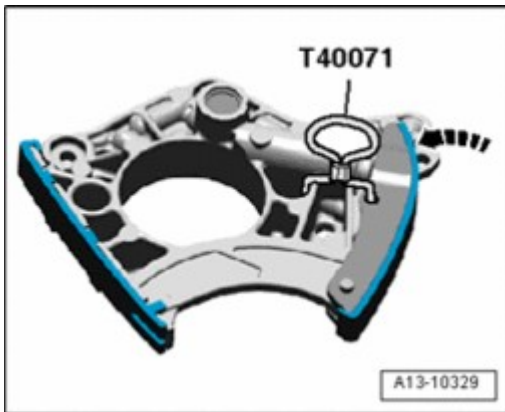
Pressing Left/Right Camshaft Timing Chain Guide Rail Inward And Securing Chain Tensioner With Locking Pin T40071
